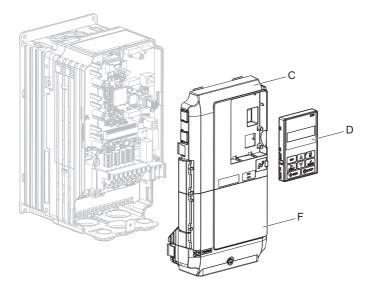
Remove the Keypad, Front Cover, and Terminal Cover
